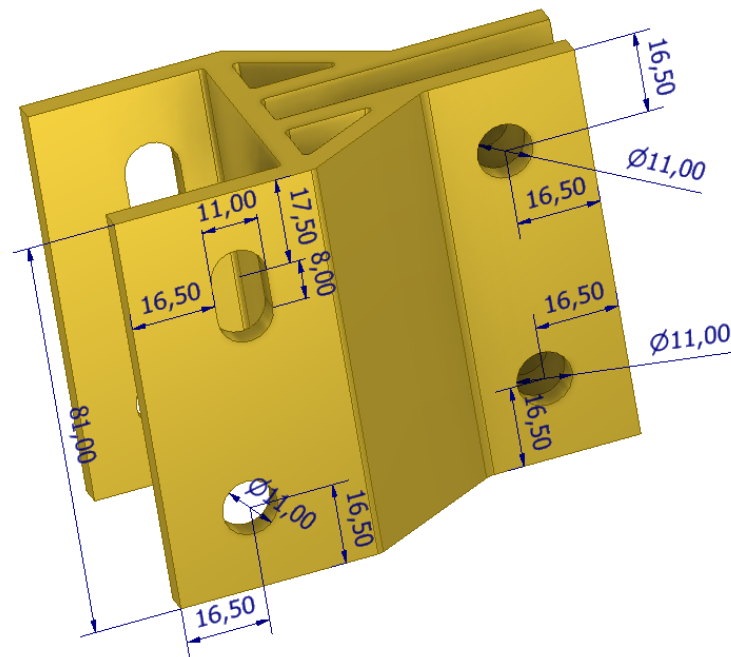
Bolt hole placement and extrusion length for small custom self-weight + wind profile. All bolts size M10. Dimensions in mm.
